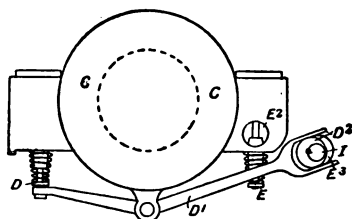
Modified Form of Roots' Explosive Engine (End View).
